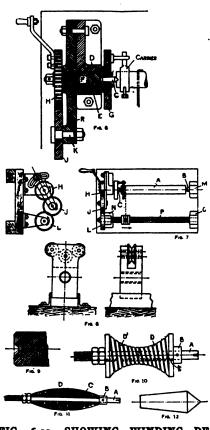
SHOWING WINDING DE-VICES, TENSION DEVICE AND MAN-DRELS FOR SPRINGS
